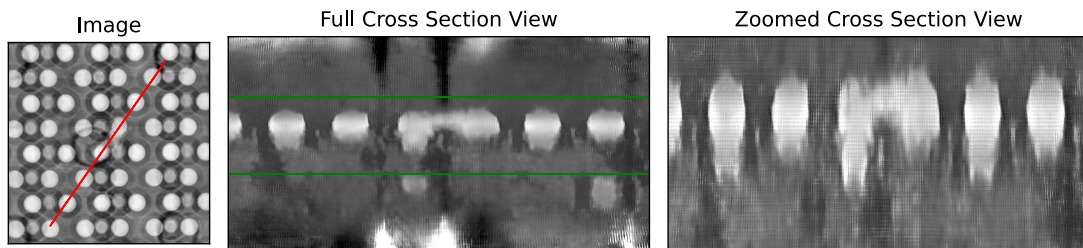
The cross-sectional view of a solder melt defect that is causing a short circuit between the 3rd bump and 4th bump from the right.
